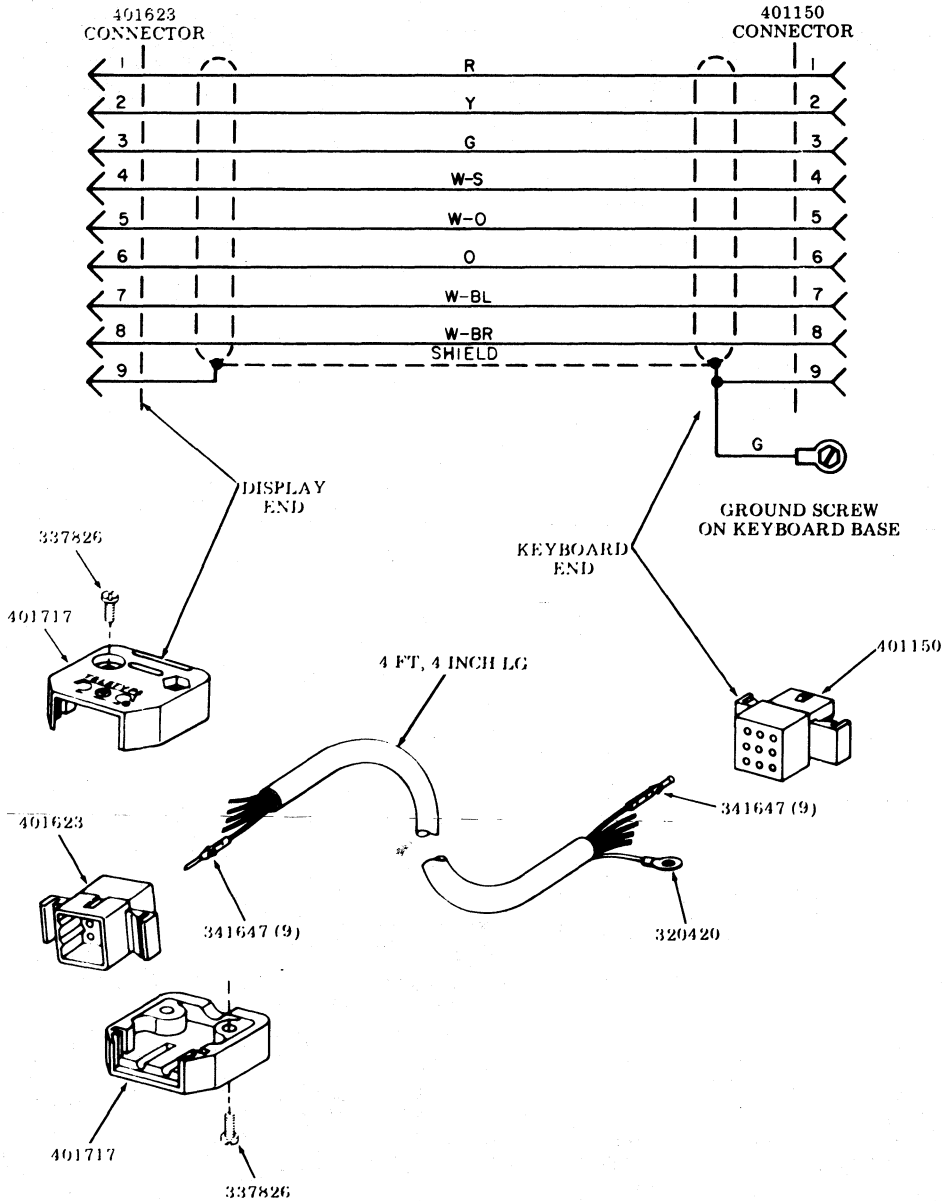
Keyboard Base Cable Assembly (45BSE301)
